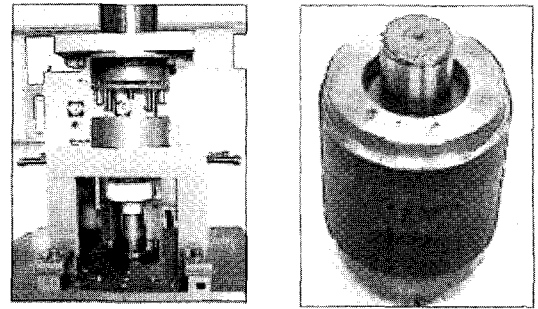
Die for Cu-rotor thixoforming and thixoformed Cu-Rotor
